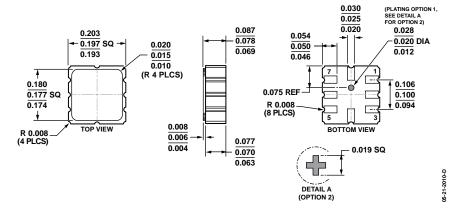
8-Terminal Ceramic Leadless Chip Carrier [LCC] (E-8-1) Dimensions shown in inches
